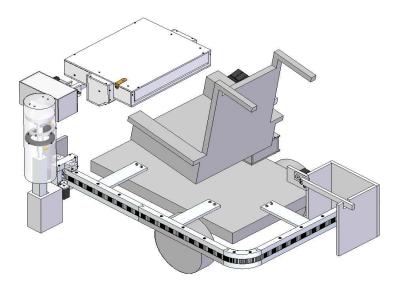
Detailed assembly drawing of Galileo attached to the wheelchair
